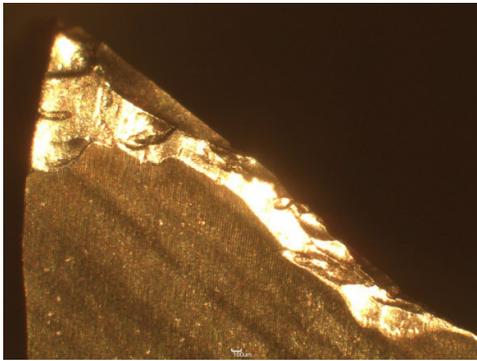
Tool flank wear for treatment 24 m/min and 0.15 mm/rev
